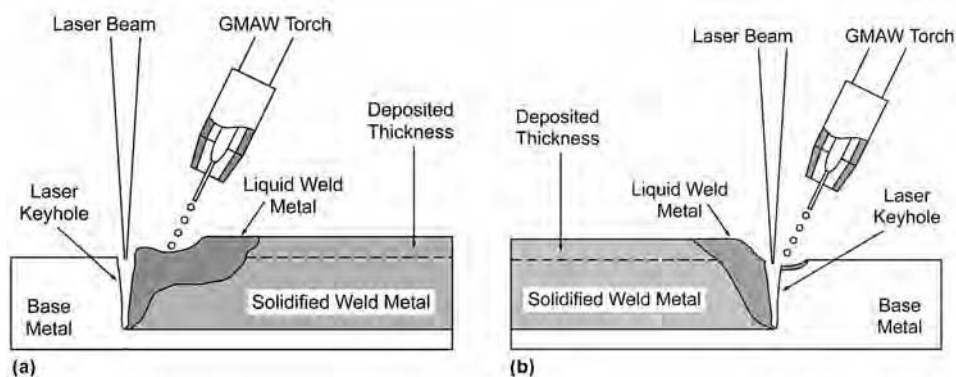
Schematic of hybrid laser arc welding process orientations. (a) Laser leading. (b) Arc leading. GMAW, gas metal arc welding
